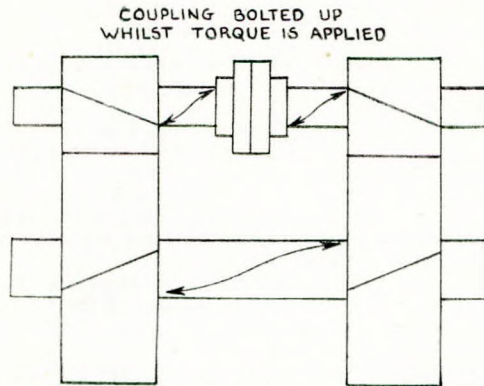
Power circulation in helical gears pre-loaded by torque
